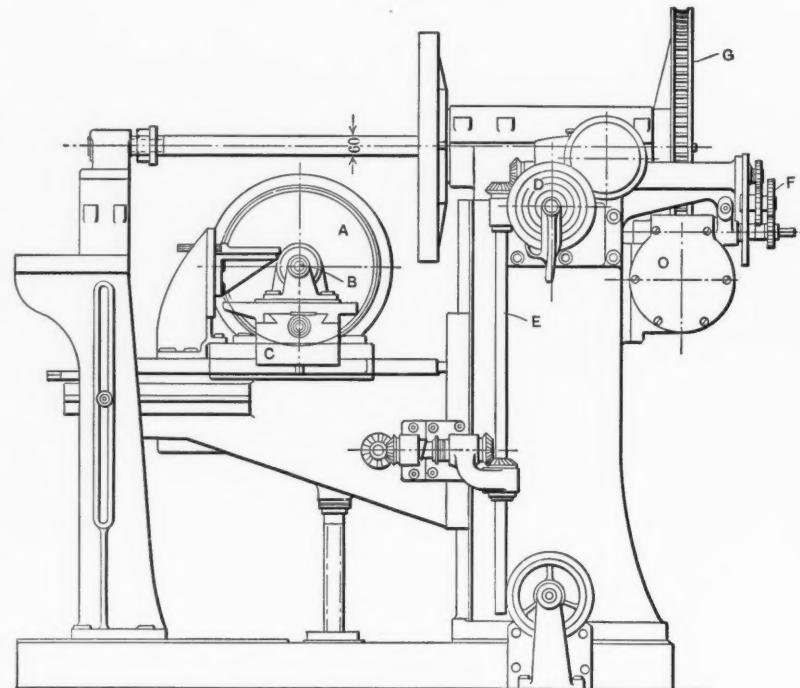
Side View of the Reinecker Universal Gear-cutting Machine, showing the Geared Connections between the Index Worm-wheel and the Feed of the Cutter Slide.
